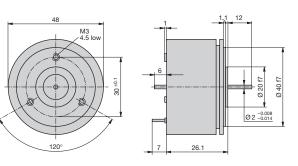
KINAX 3W2 with special drive shaft at front and at rear. At front: Ø 2 mm, length 12 mm. At rear: Ø 2 mm, length 6 mm.
